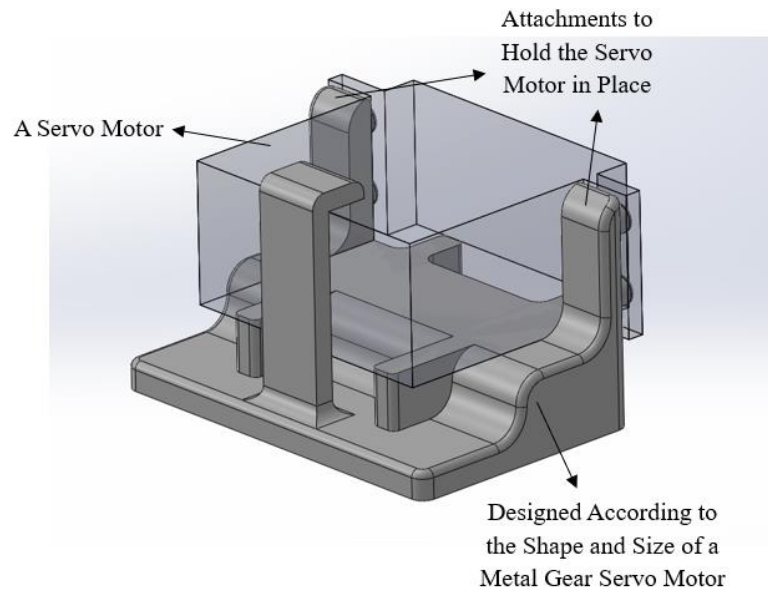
Drawing of Final Prototype Servo Motor Holder for 4 Fingers Part in Isometric View.
